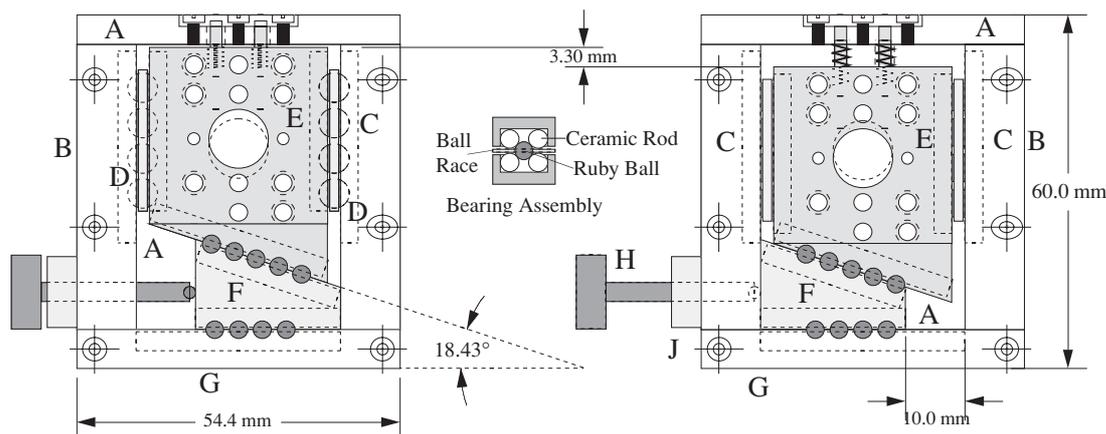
The new translator which uses a combined wedge drive assembly and linear bearing. The two extreme positions of the wedge and sliding table which drives in the $\pm z$ direction are illustrated. The inset shows the bearing assembly constructed from four ground and polished ceramic rods together with highly polished ruby balls. For details, see the text.
